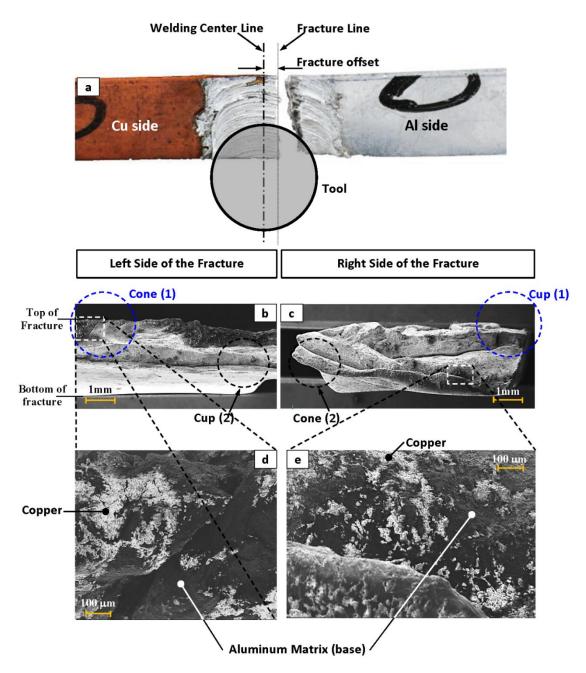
A photo and SEM images of the fracture of an Al- annealed Cu Butt joint that is welded by FSW at 1700 rpm and 16 mm/min. The joint has been fractured due to tensile testing.
